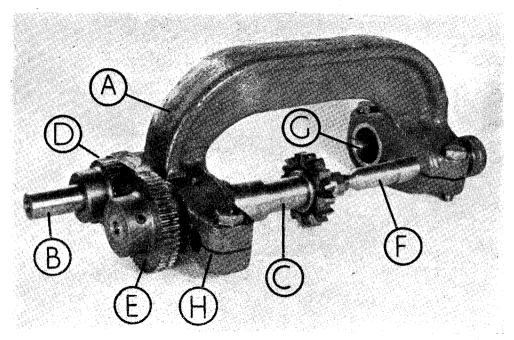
The Target attachment. "A"—the frame casting; "B"—the driving shaft; "C"—the cutter arbor; "D" and "E"—the gear wheels; "F"—the coned support spindle; "G"—the tailstock bush; "H"—the thrust-rod clamp
